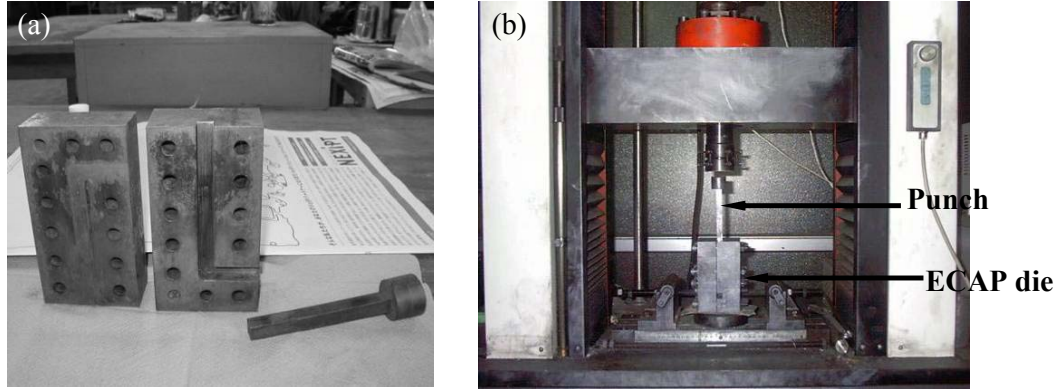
Macro-photograph of (a) geometry of the ECAP die; and (b) construction of the ECAP die and pressing machine.
